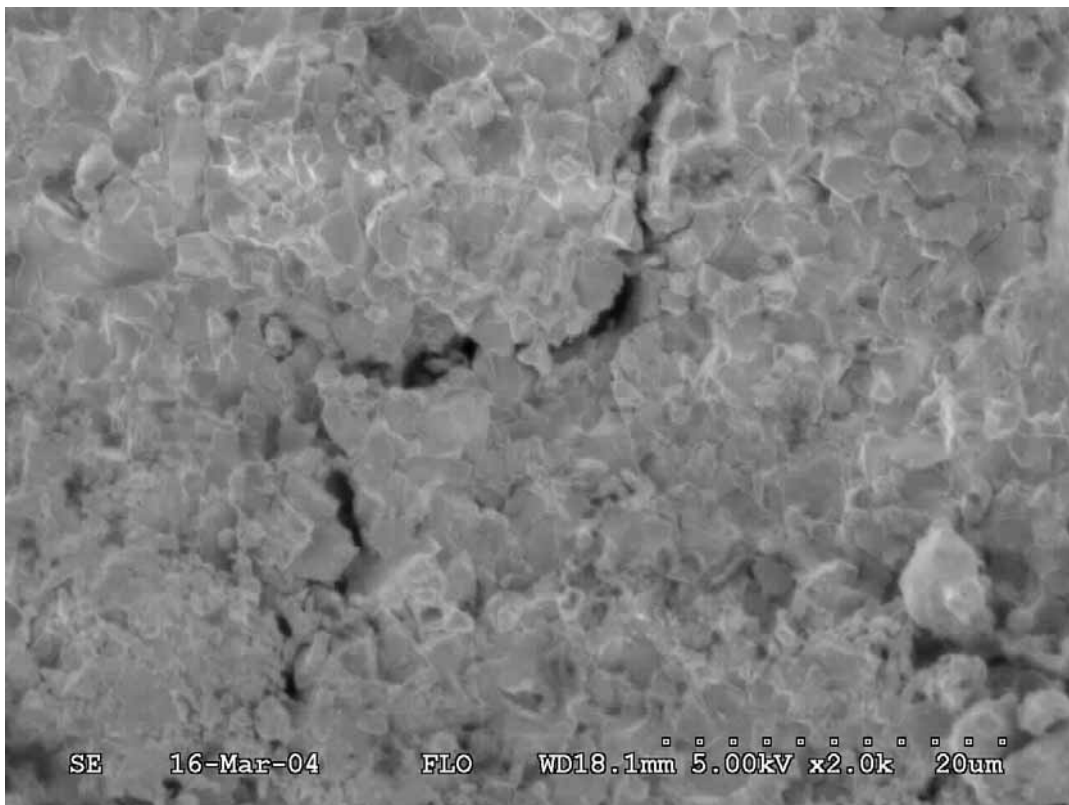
Fracture surface with crack. (LOT ...-00)
